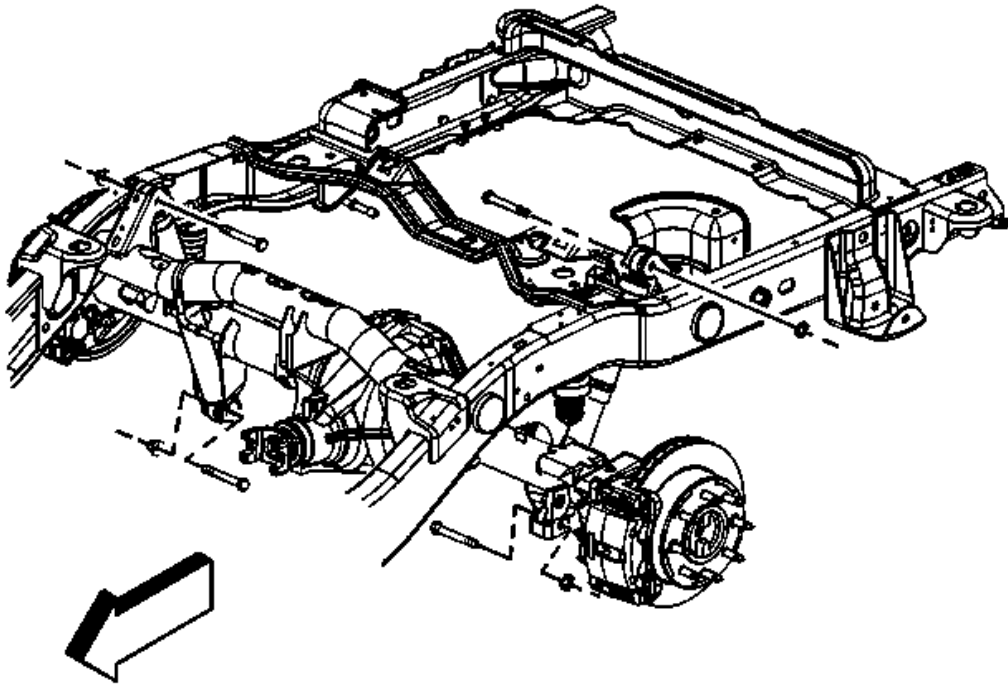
Rear Shock Absorber Bolts And Nuts (6.0L, 6.6L, and 8.1L Engines)
